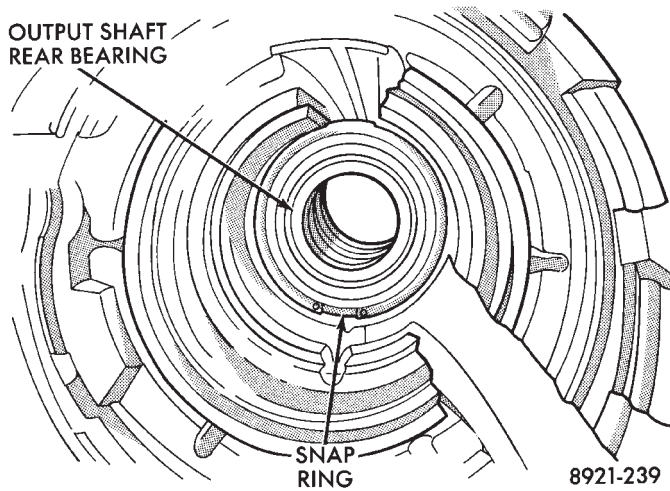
Output Shaft Rear Bearing And Snap Ring Location
